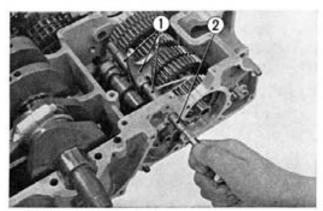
① Gear shift forks ② Gear shift fork shaft
